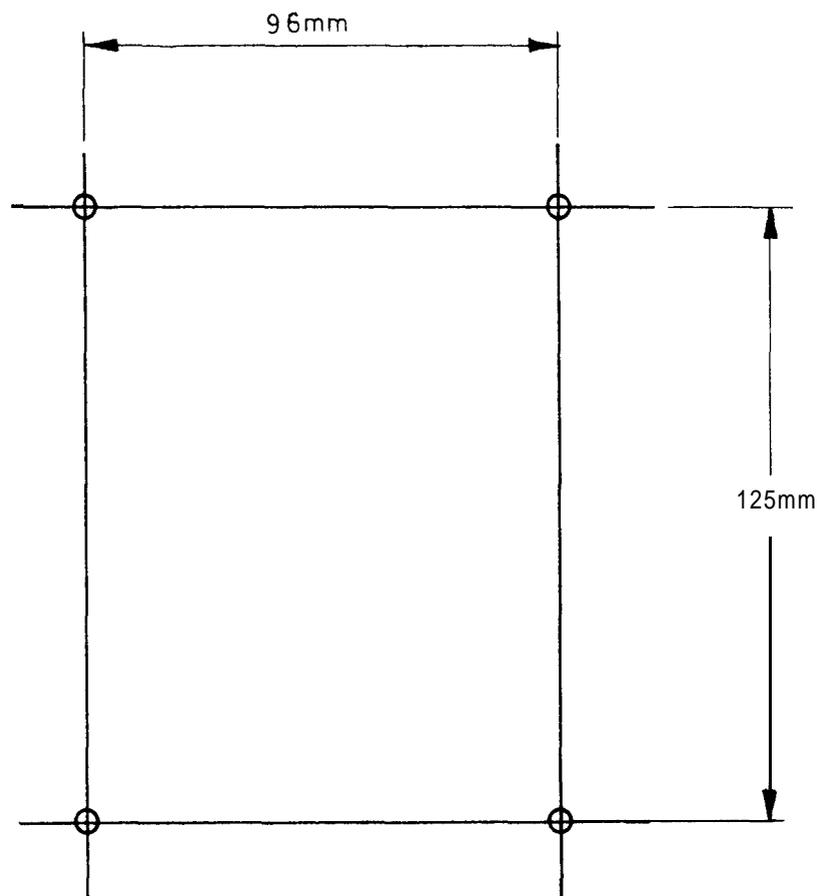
WALL MOUNTING FOR RING GENERATOR UNIT
